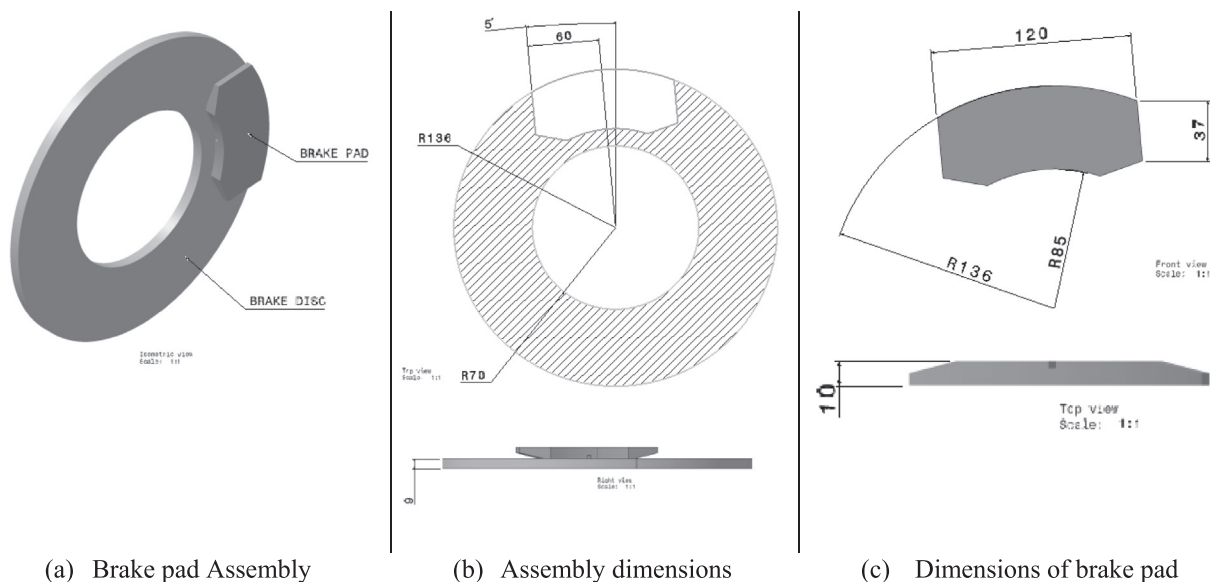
Schematic drawing of Brake pad with Rotor disc [MODEL] All dimensions are in mm, Different Eco-friendly fibers.
